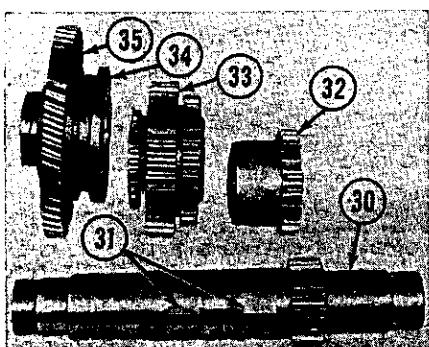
Dismantled countershaft from tractor having dual plate clutch. Note the hollow shaft. Refer to Fig. 108 for legend.
